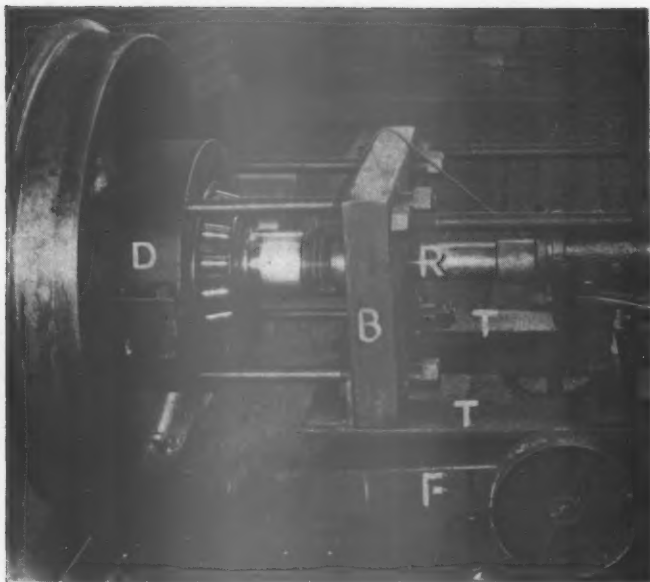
Close-up view showing the puller, as equipped to remove the Timken inner cone without pressing off the car wheel
